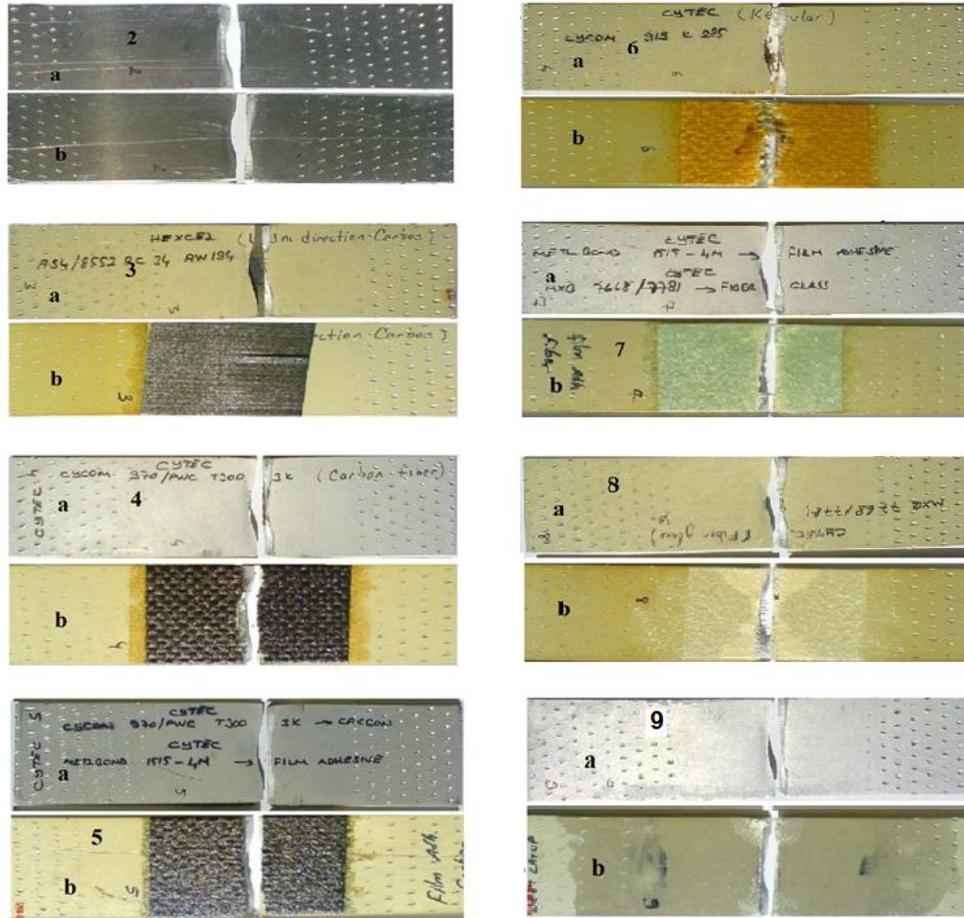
(a) front views and (b) back views of specimens after tensile test
